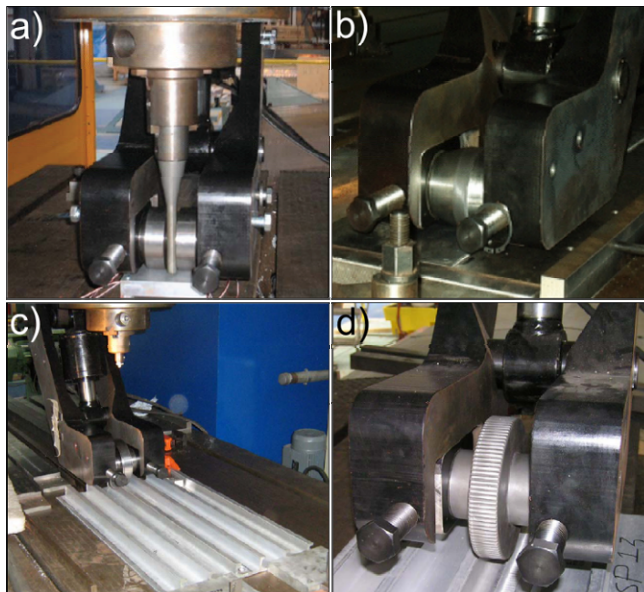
Illustration of the varying roller tensioning set-ups with (a) the double roller following the FSW tool closely as to roller deform the hot material (ISRT), (b) the single roll for PWRT flat sheet, (c) the single roll for PWRT ISP material and (d) the corrugated roller for PWRT the ISP material.
